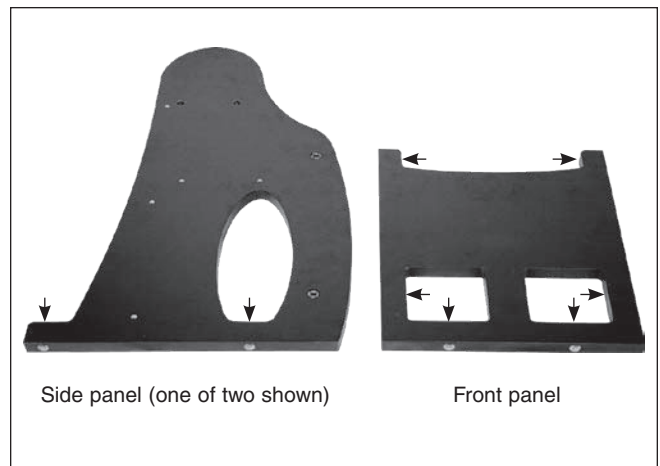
Locations for insertion of connecting bolts in the front and side panels (one side panel and side braces not shown). Connecting bolts should be inserted in the predrilled holes in the direction indicated by the arrows.
